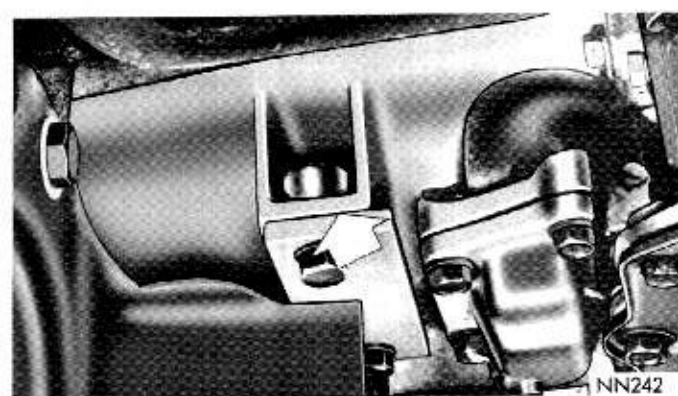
Shim Location (Front Universal Joint Angle Correction)
